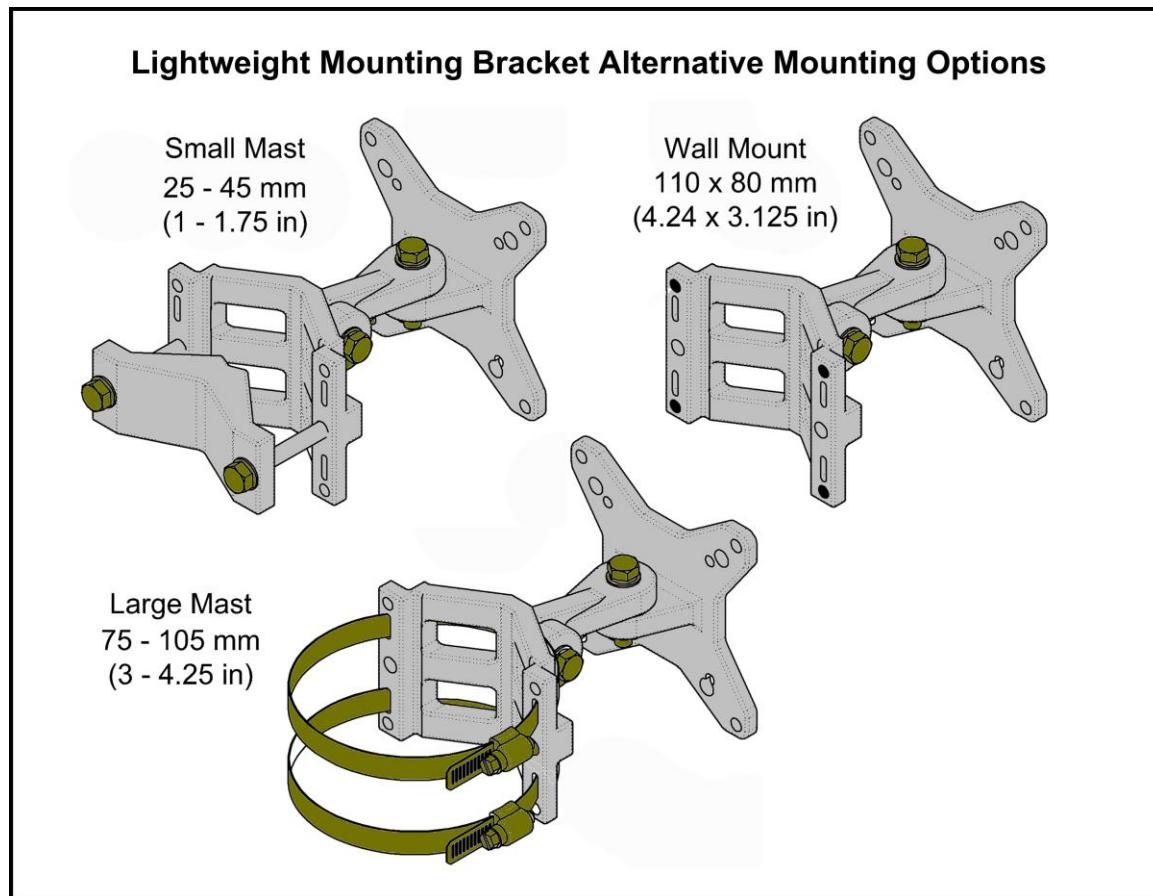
Installation: Mounting Kit - Alternative Mounting Methods
